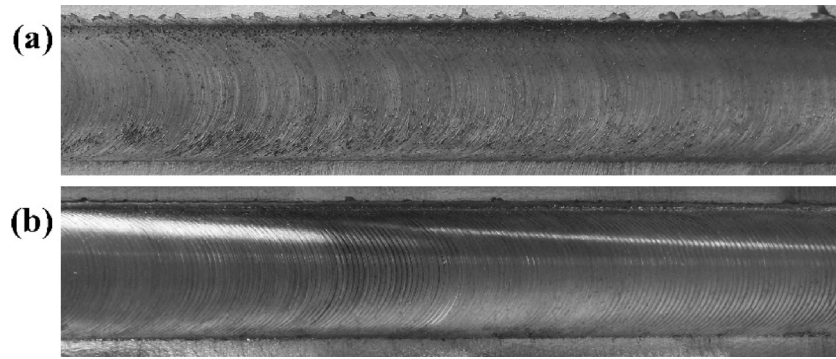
Surface appearance of (a) original weld and (b) weld subjected to FSP-5.
